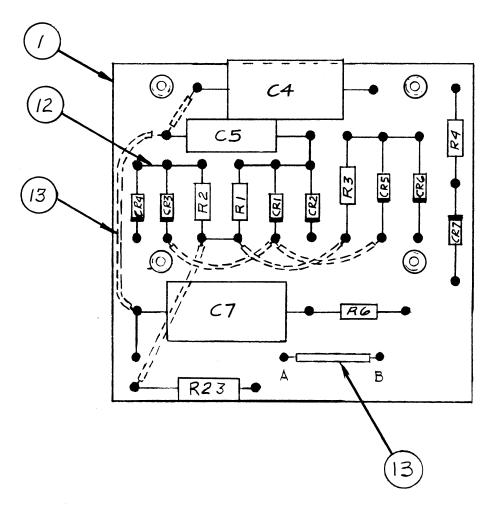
Board Assembly Amplifier Chassis 1C693 Serial No. 241 & Up 100
